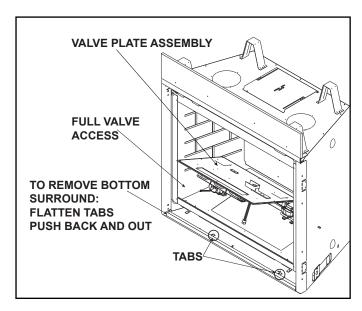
Gas Valve Access (Generic Fireplace Shown)
